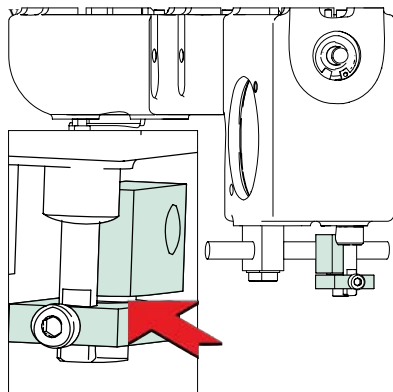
Thread trimmer drive lubrication points (view of cylinder arm from rear)
